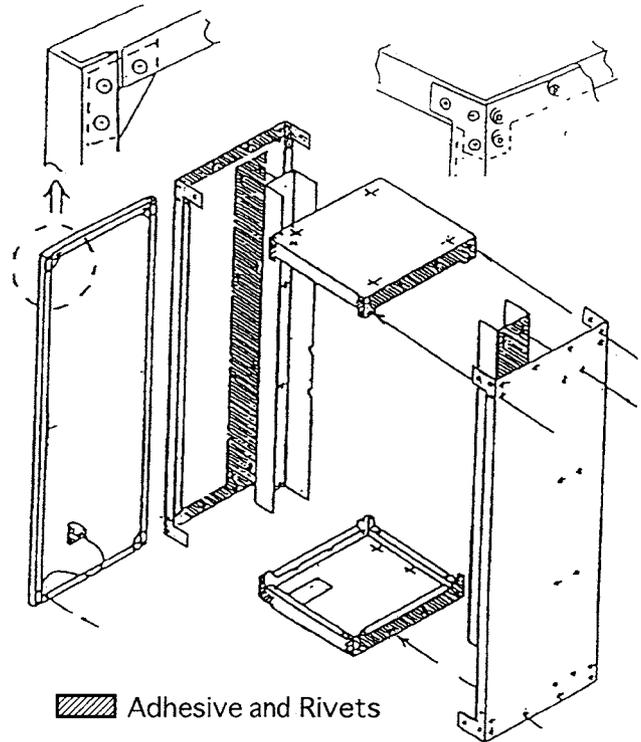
One example of control panel enclosures assembled by the combined use of adhesive and rivets (800 mm  $W \times$  800 mm  $D \times$  2300 mm  $H$ ).
